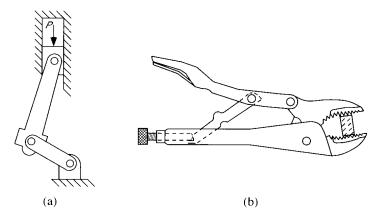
Examples of rigid-link mechanisms: (a) part of a reciprocating engine, and (b) Vise Grip.
